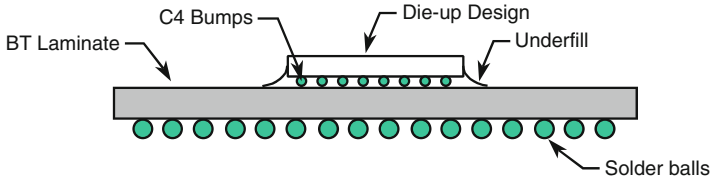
Cross sectional view of a BGA packaged IC [10]
